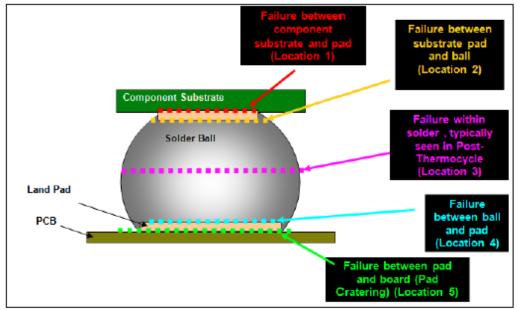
Various Possible Failure Modes for a BGA Solder Joint
